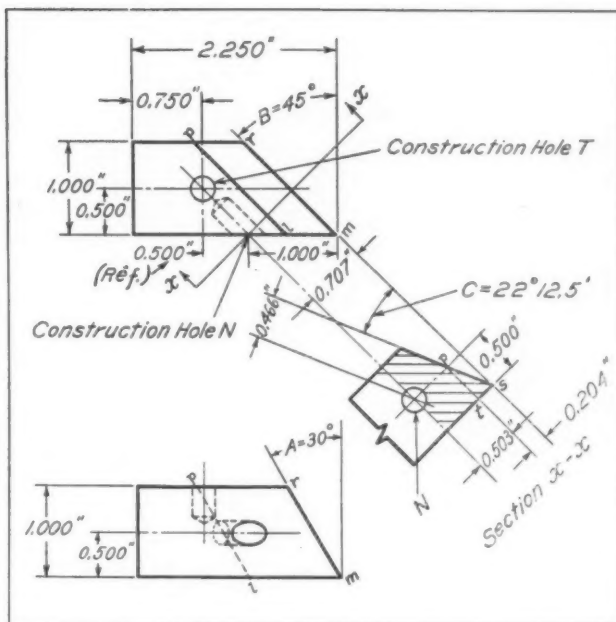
A Compound-angle Block Problem Showing Given and Computed Linear and Angular Dimensions Needed for Accurate Machining and Checking
